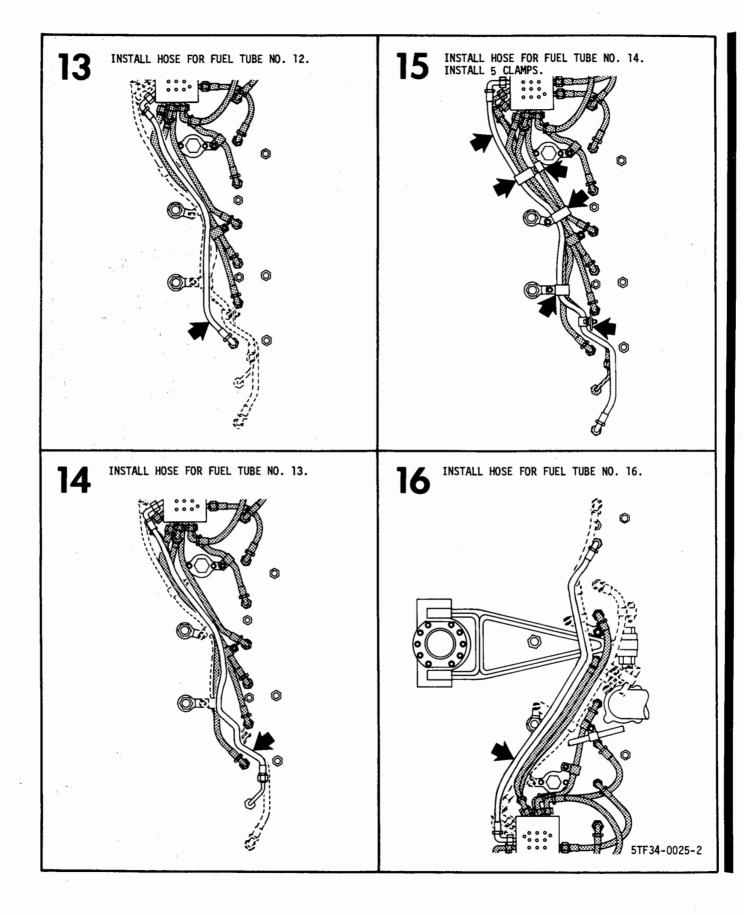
Fuel Manifold Installation (Sheet 5 of 6)
